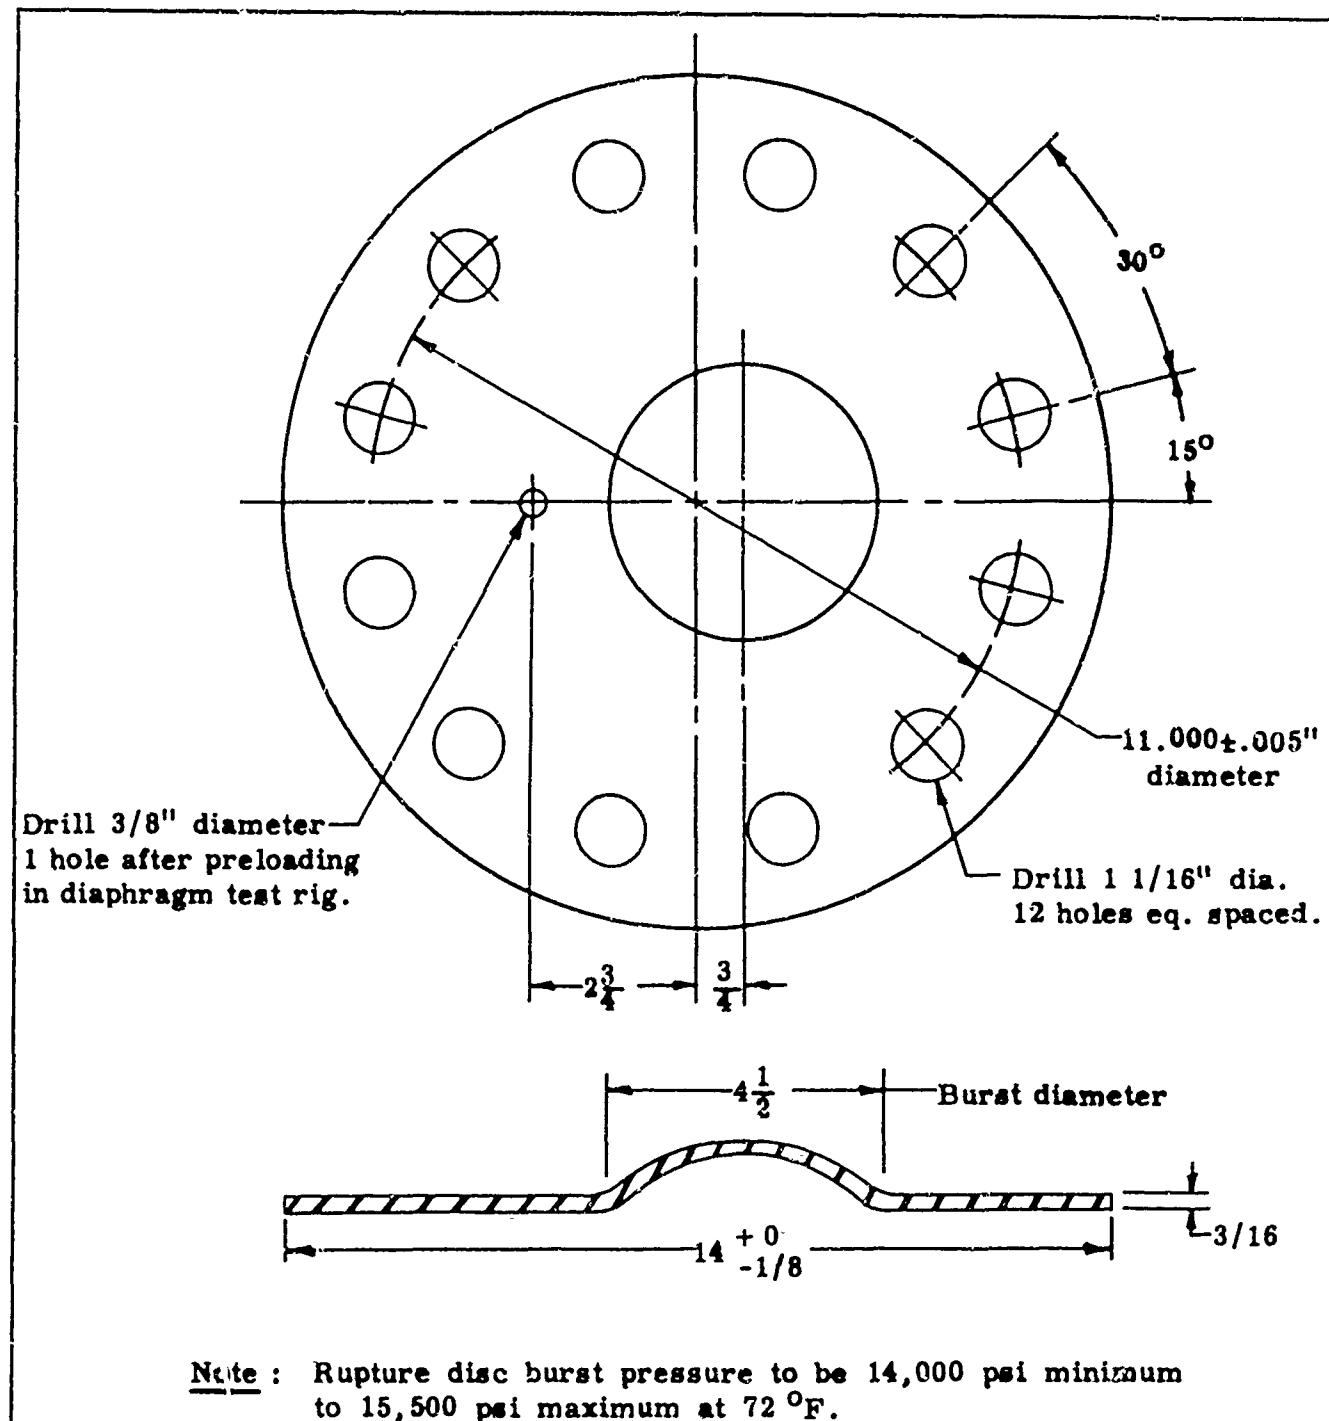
DESIGN DETAILS OF DRIVER COUPLING
